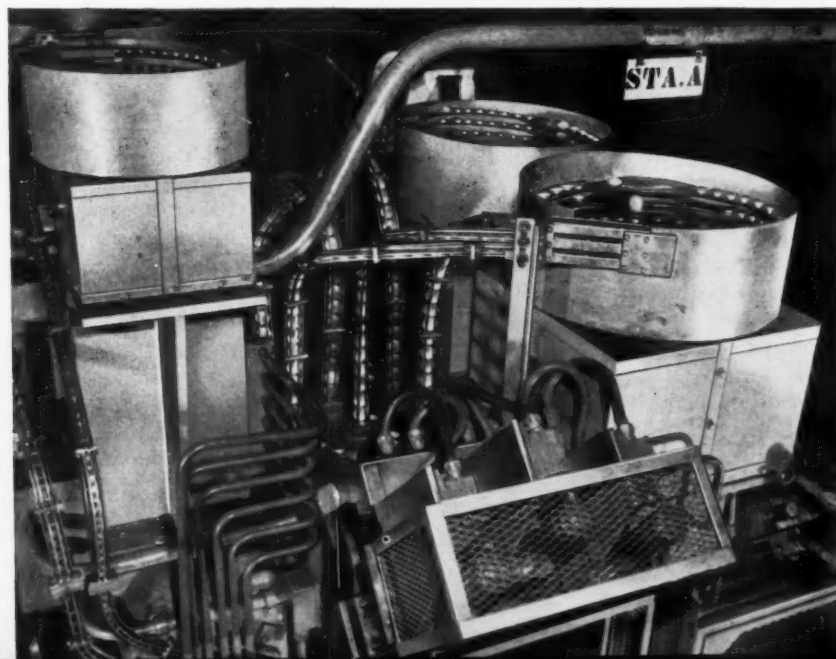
(Above) Automatic, double-bank inspection machine checks eight bores simultaneously for diameter, out-of-round, taper, and bellmouth condition.
